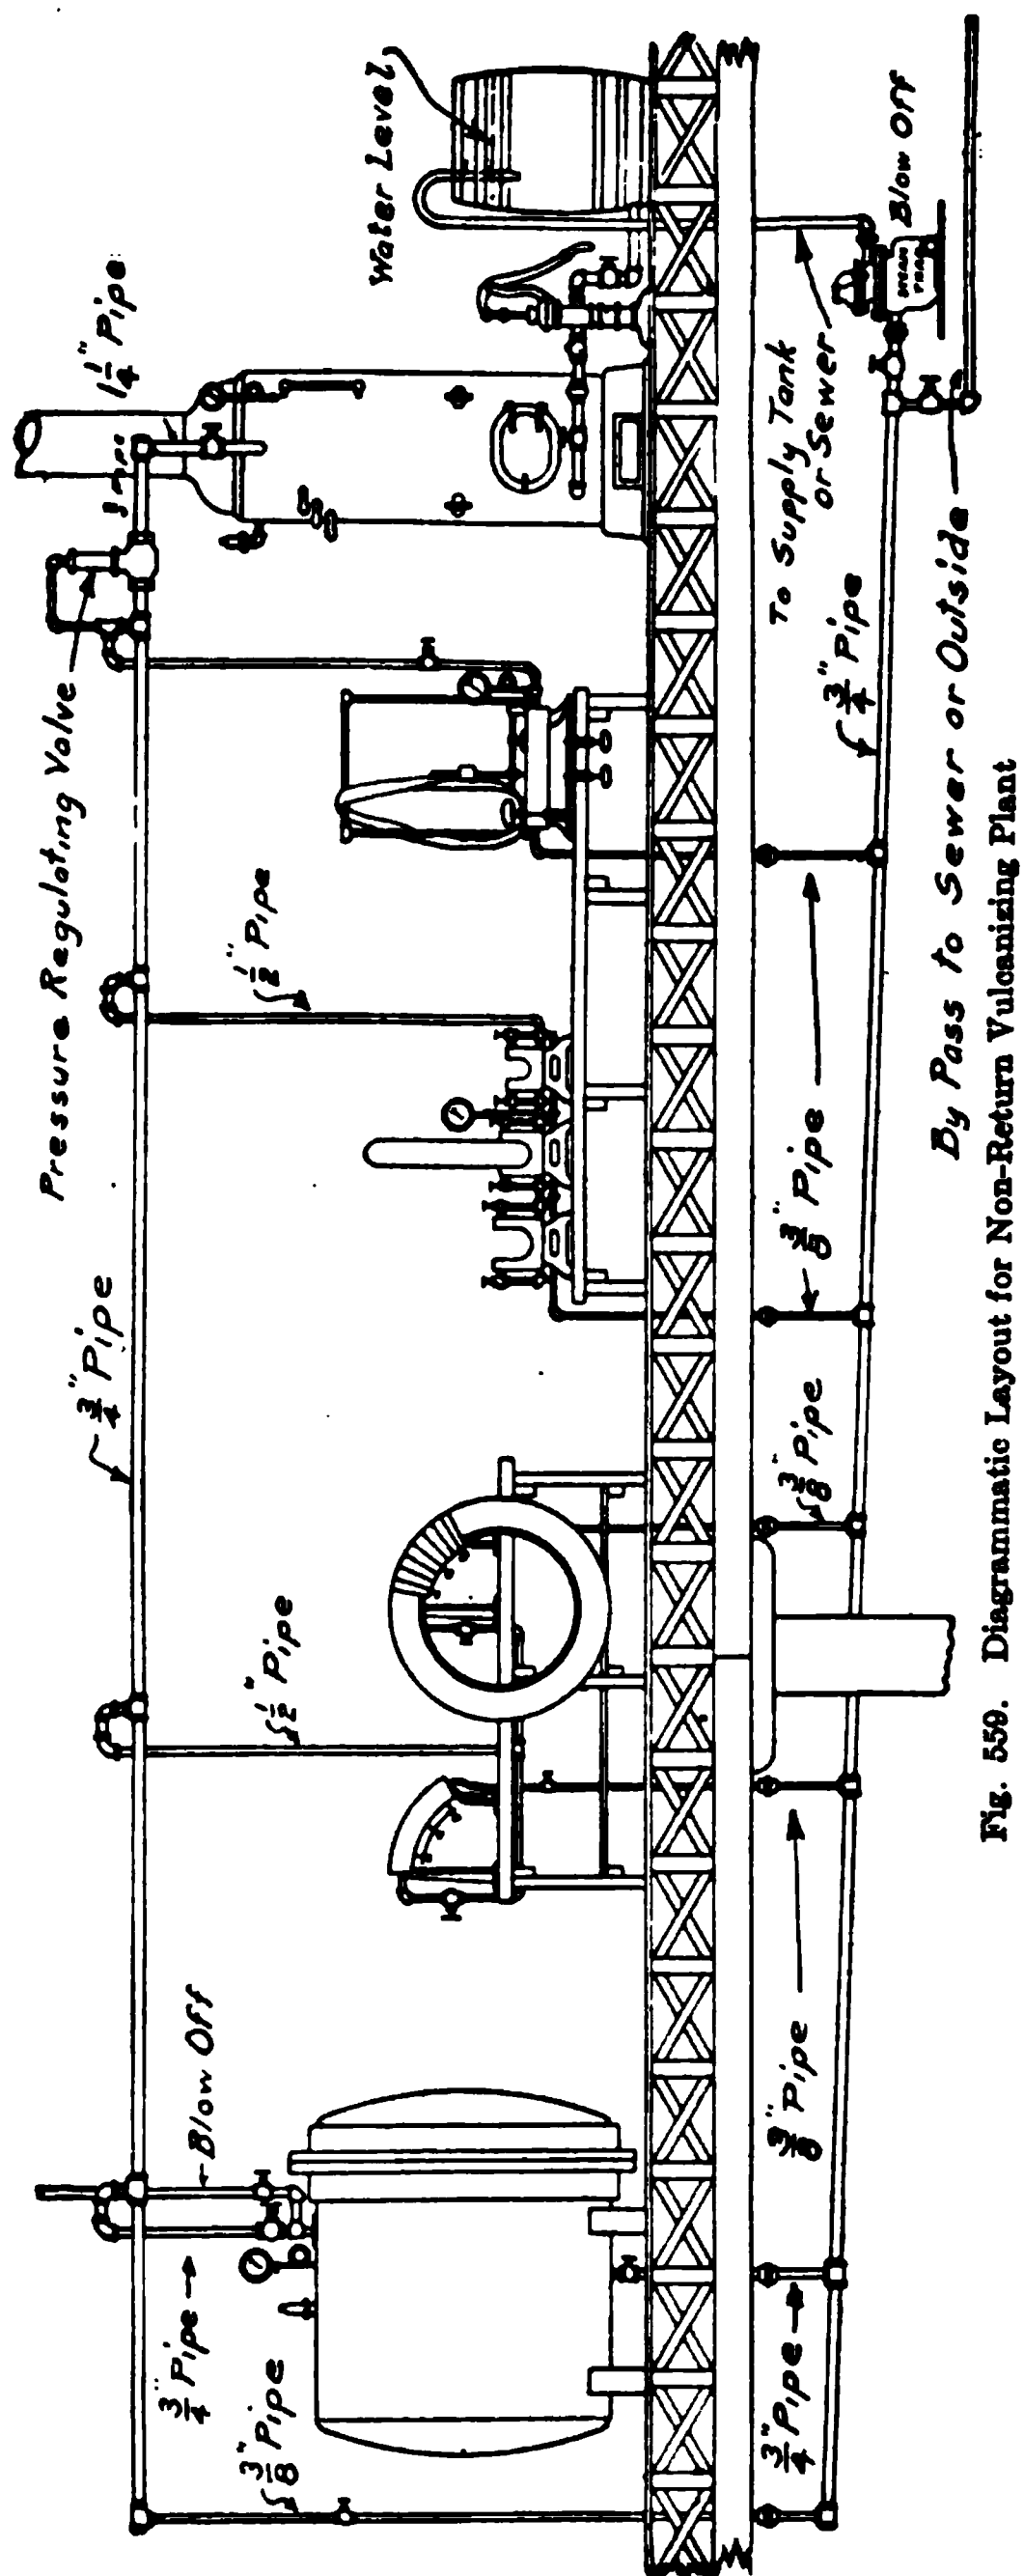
Diagrammatic Layout for Non-Return Vulcanizing Plant
